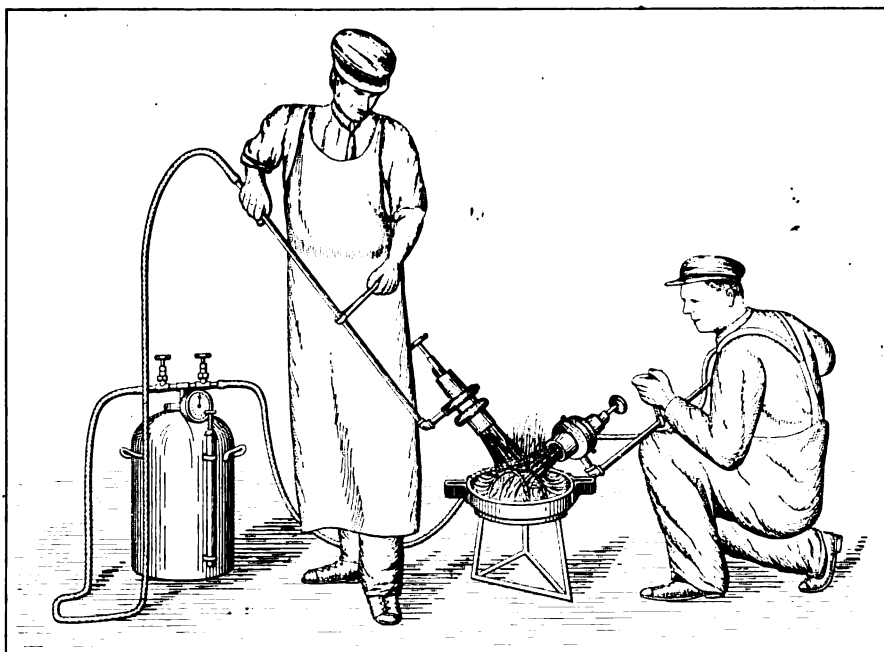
Turner hot-blast brazing machine in which either gasoline or kerosene is used
